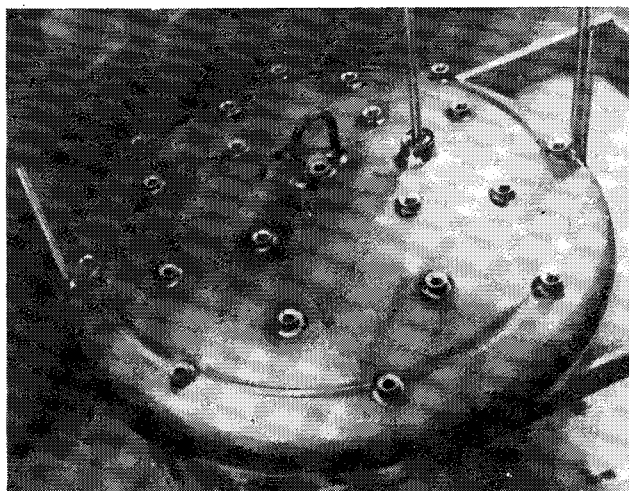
LH_2 Vessel Head Assembly of Life Cycle Test Apparatus
